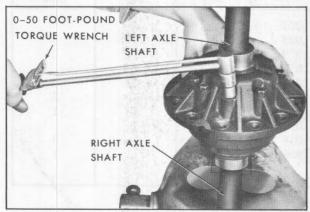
Tightening Gear Case Screws (Controlled)
